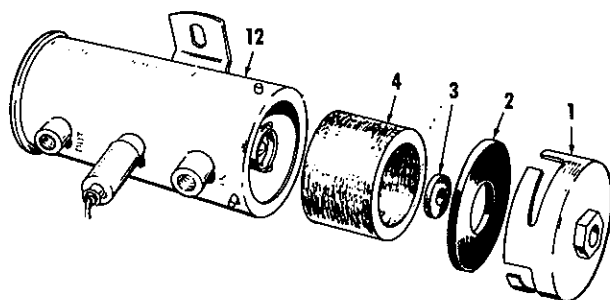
REMOVAL OF BOTTOM COVER, GASKET, MAGNET AND FILTER
